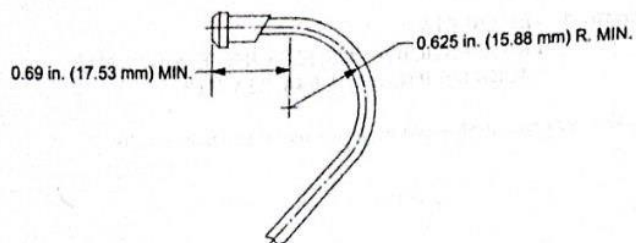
Fuel Line Showing Minimum Dimension for Bending
